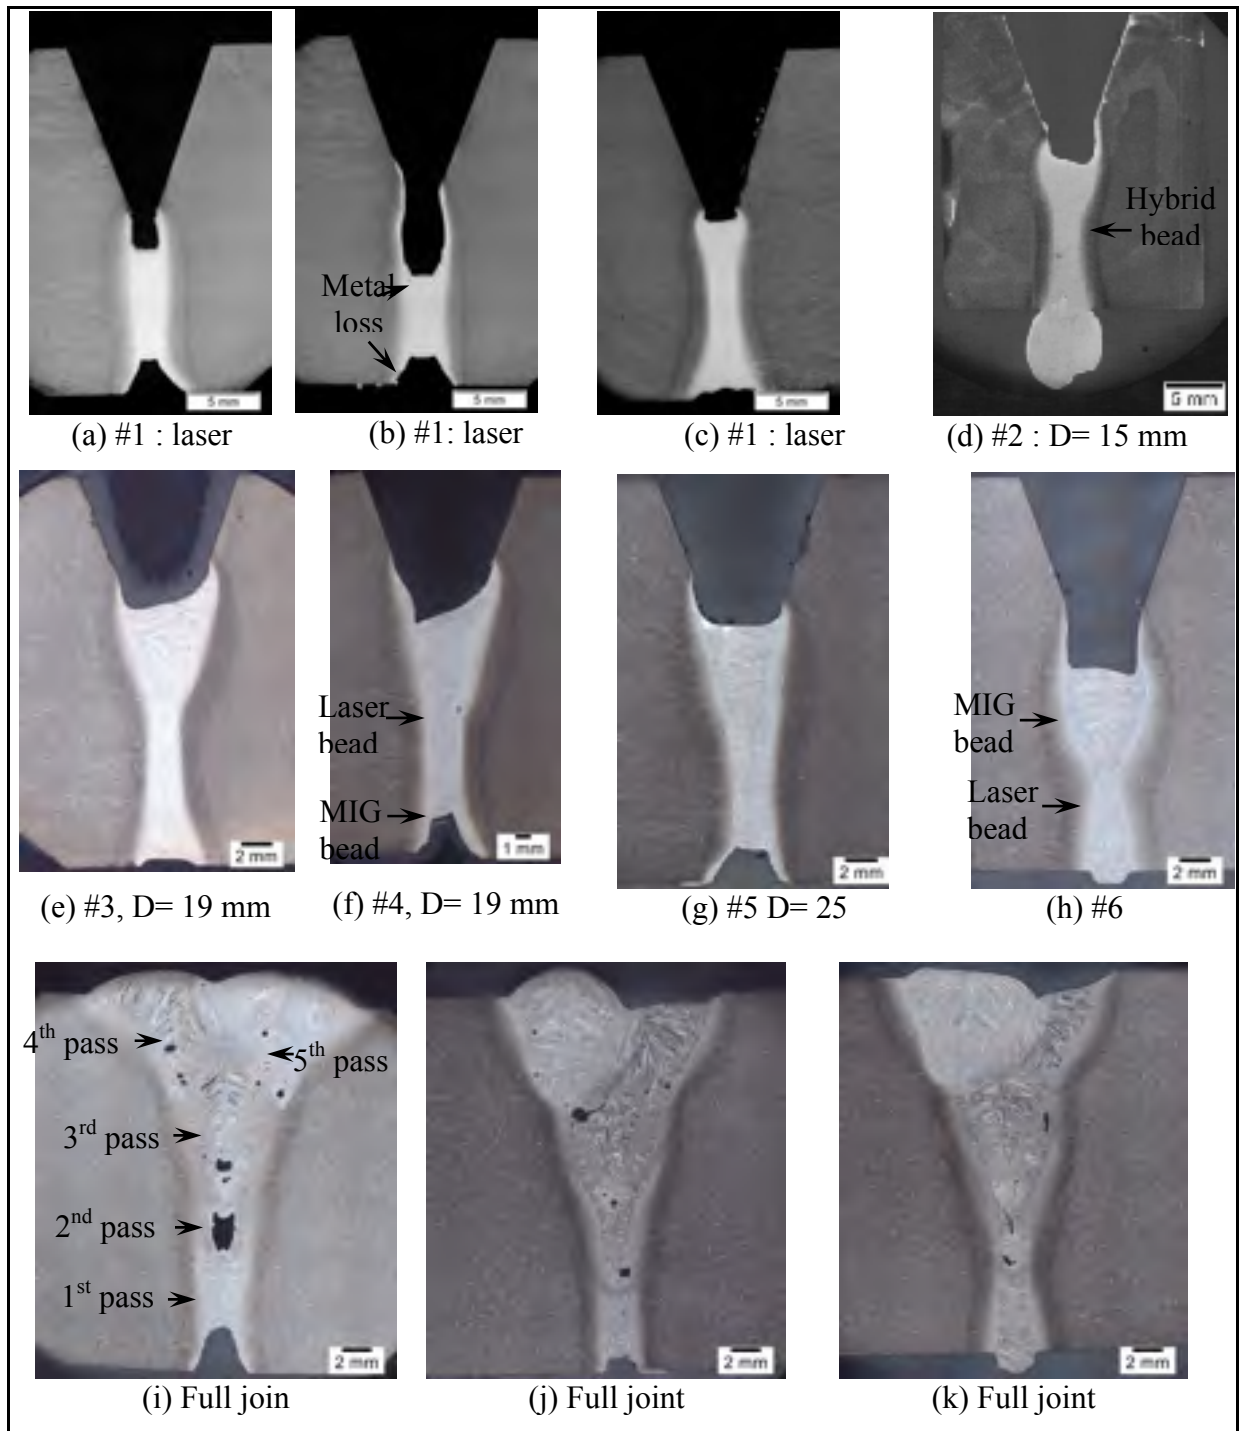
Transverse sections of the welds manufactured at different welding conditions: (a-c) for the laser root pass, (d) hybrid, trial #2, (e-h) tandem trial #3-6, (i-k) full joint
